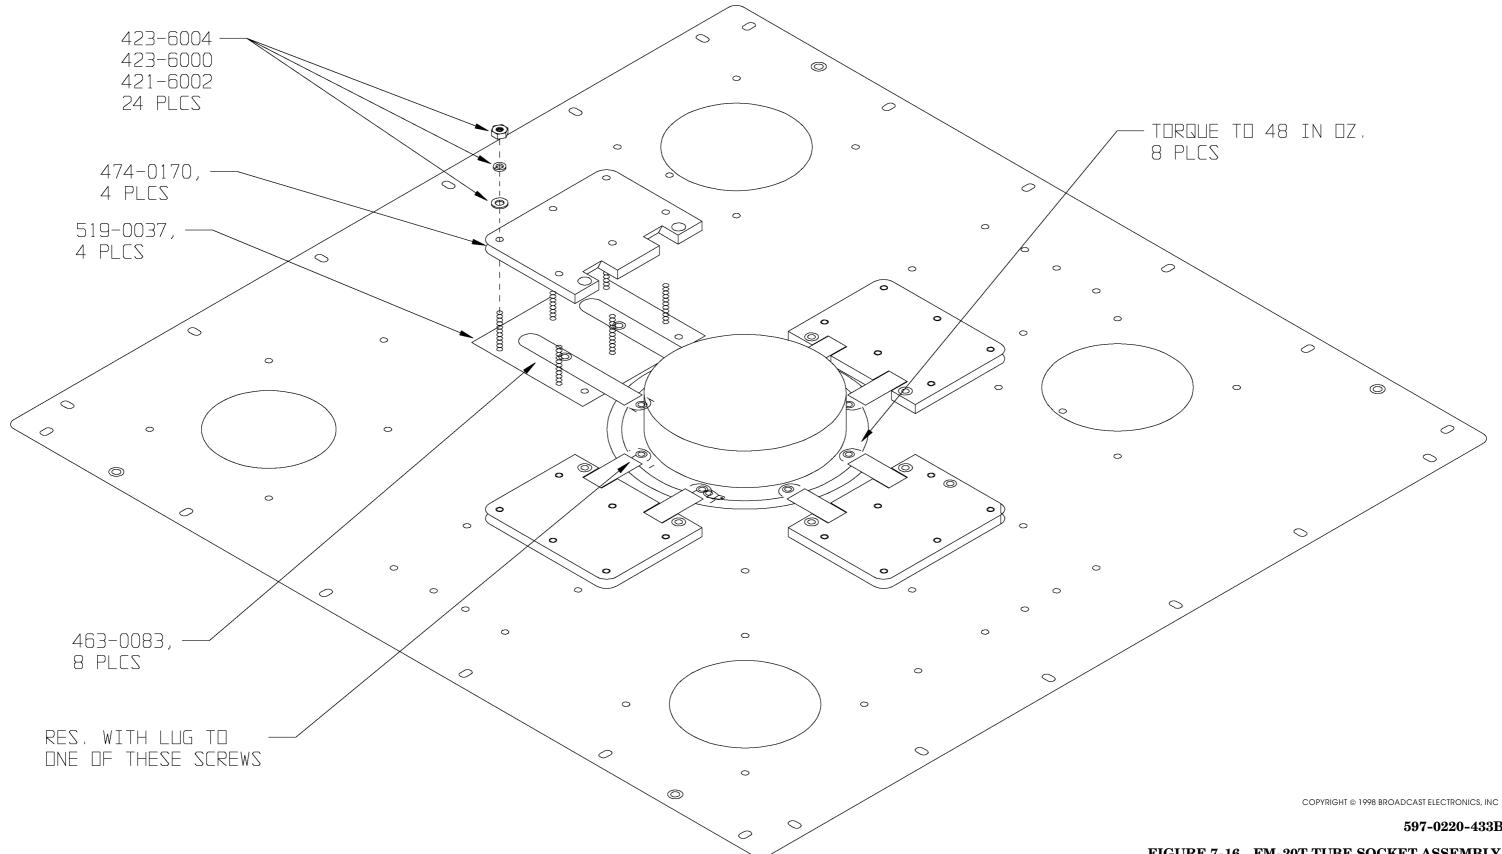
FM-20T TUBE SOCKET ASSEMBLY (SHEET 2 OF 3)
